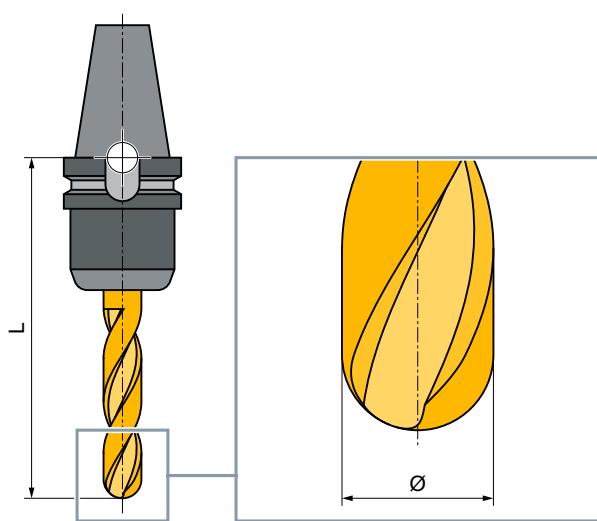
3D tool with an example of a cylindrical die-sinking cutter (Type 110)
